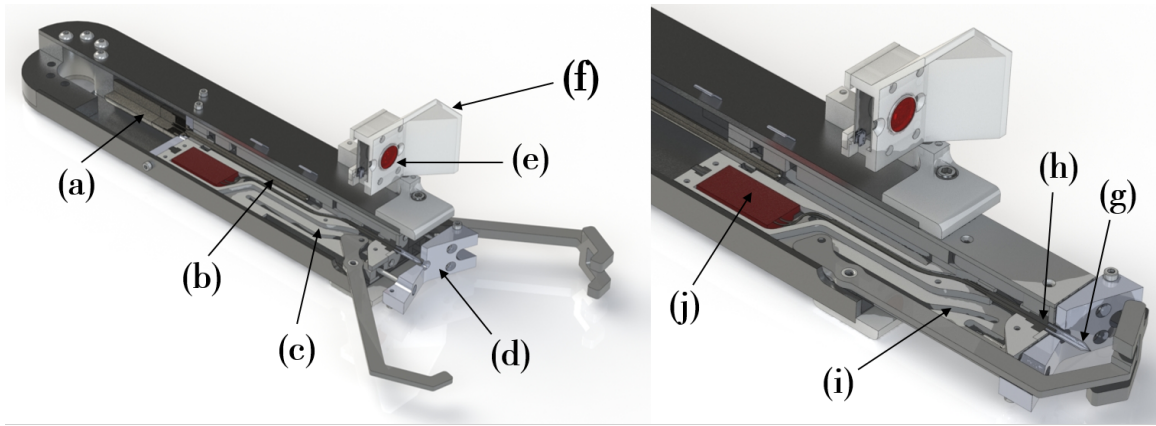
Cutaway of the custom gripper: (a) Maxon Motor EC16 brushless DC motor; (b) Maxon Motor GP16S ball screw; (c) acetal plunger block; (d) v-block for centering plants; (e) Code Laboratories DUO3d stereo camera; (f) sun shield; (g) needle for penetrating stalk walls; (h) Futek 11b215 load cell; (i) track for actuating fingers; (j) instrumentation amplifier and A2D converter.
